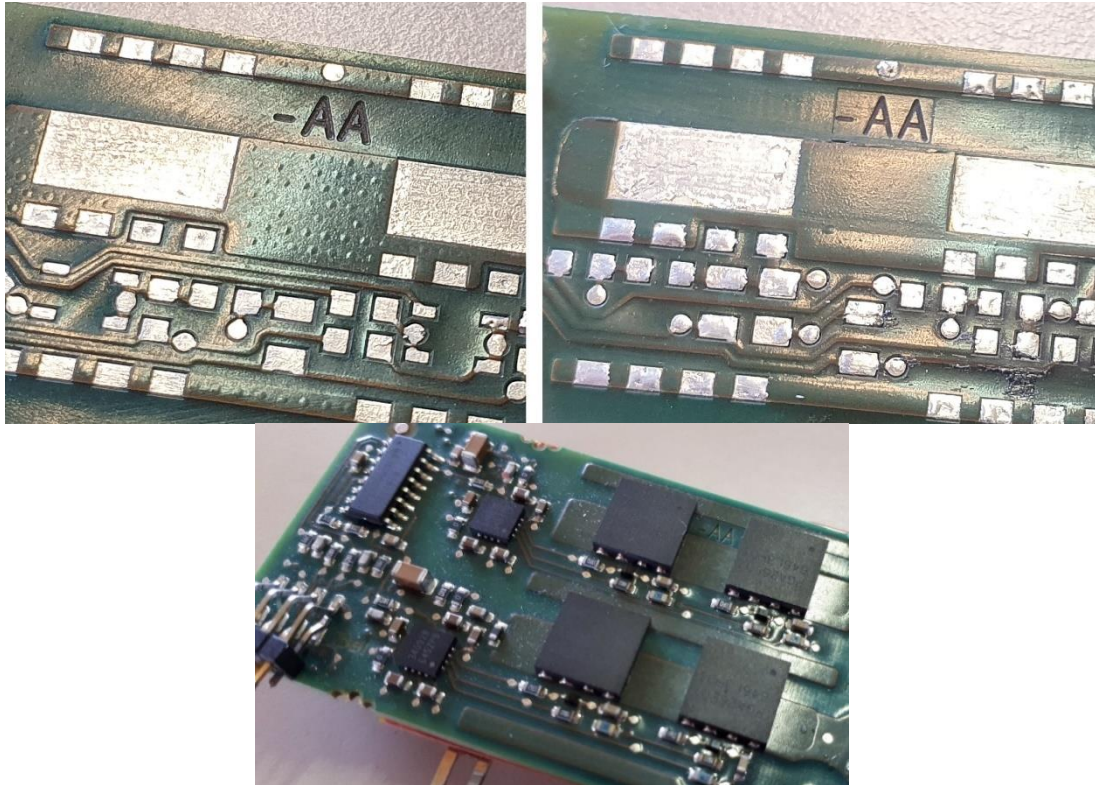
Pictures of prototypes – printed circuit board with thermal vias technology (left), PCB with copper inlay (right) and assembled prototype
